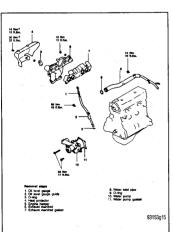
Exhaust manifold exploded view-2.0L SOHC engine
